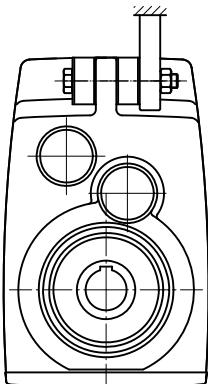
Mounting the rubber buffer (Option G and/or VG) on parallel shaft gear units
